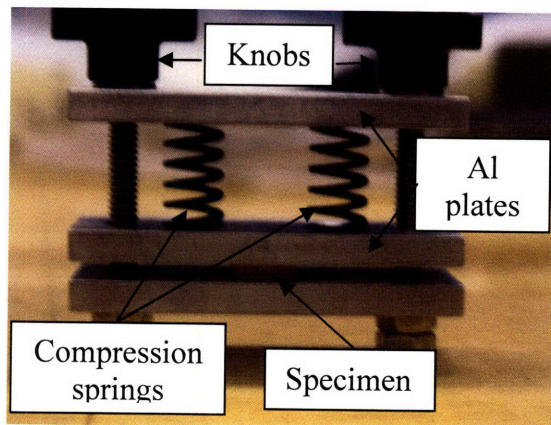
Pressing apparatus used to press the In-Sn-Cu TLP joints.
